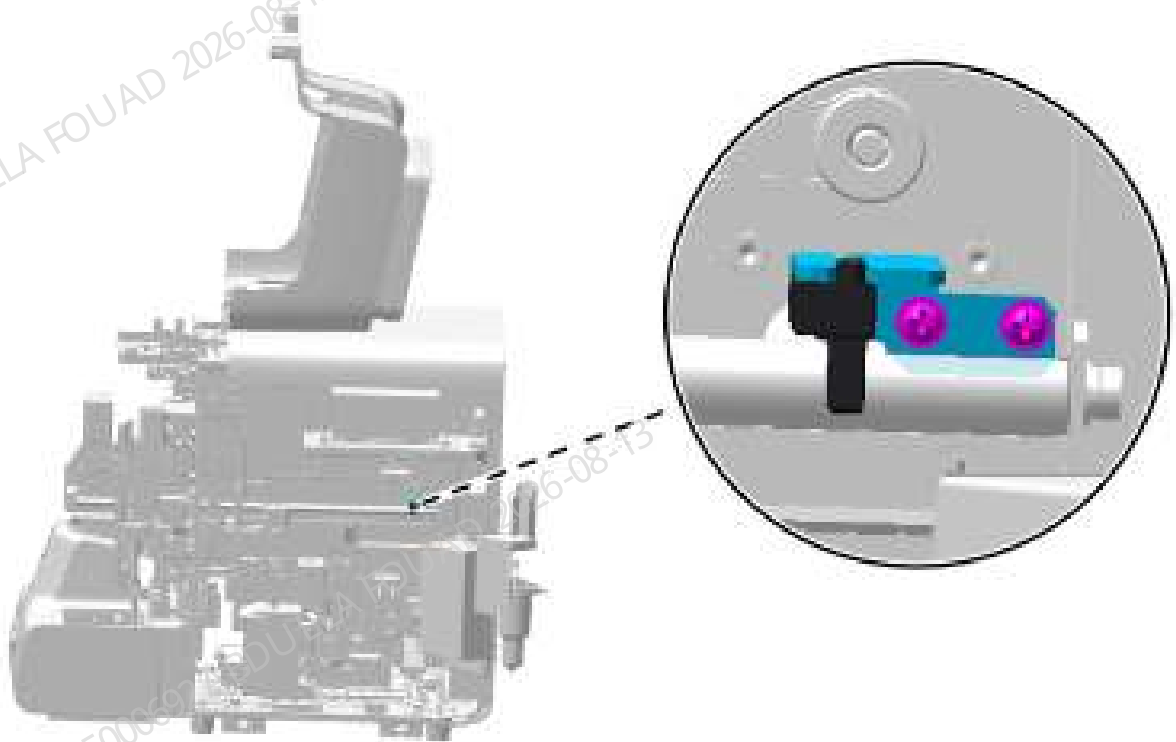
Removing the Y-direction initial position sensor wires of sampling
